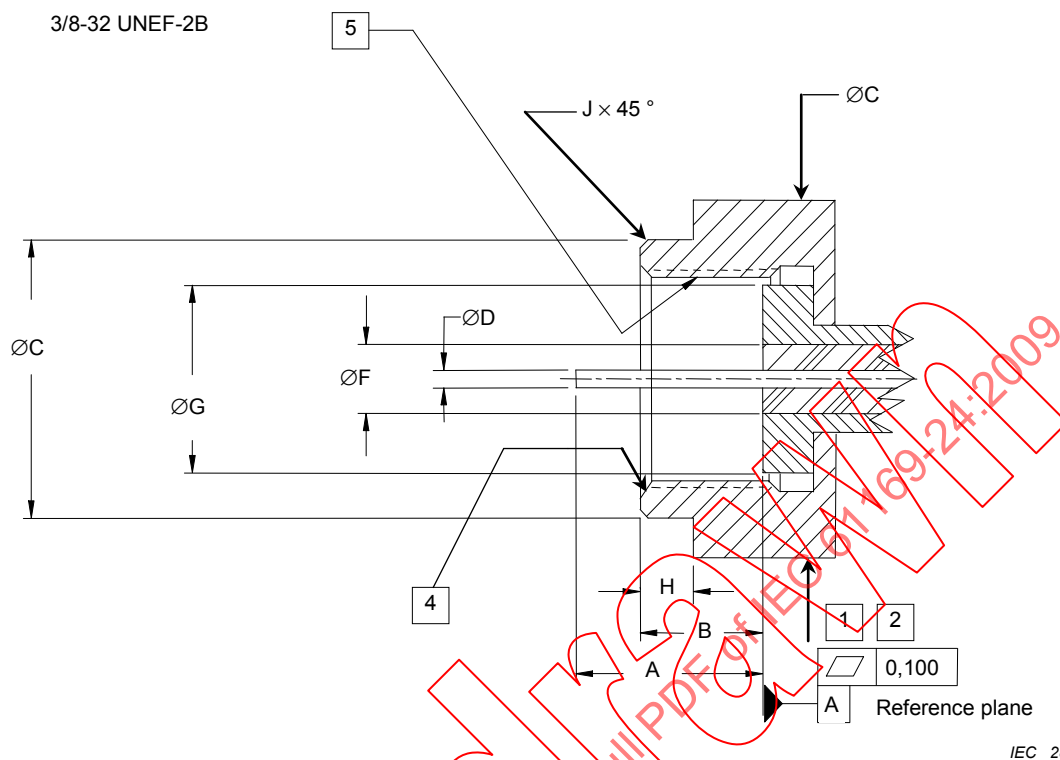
Outdoor “F” type male plug (for dimensions, see Table A.2)
